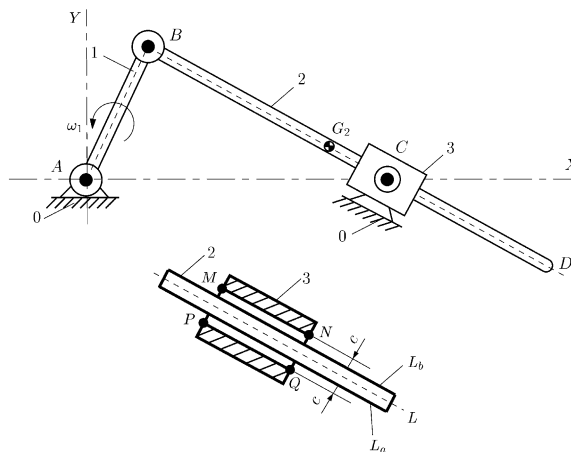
Simplified model of the rigid-link mechanism with rotating slider joint and clearance.
